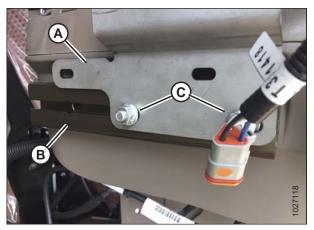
Side View of Seat with Supports Installed in Alternative Location
